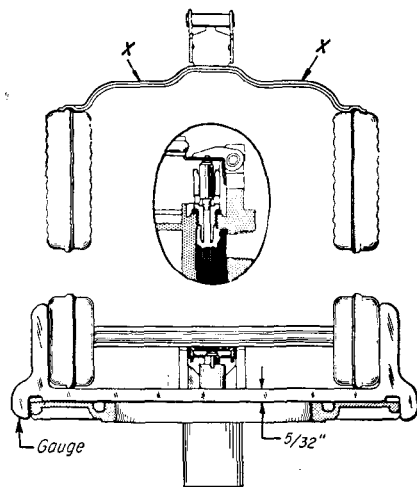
Check of float-level height and adjustment of float assembly. (Buick Motor Division of General Motors Corporation)
